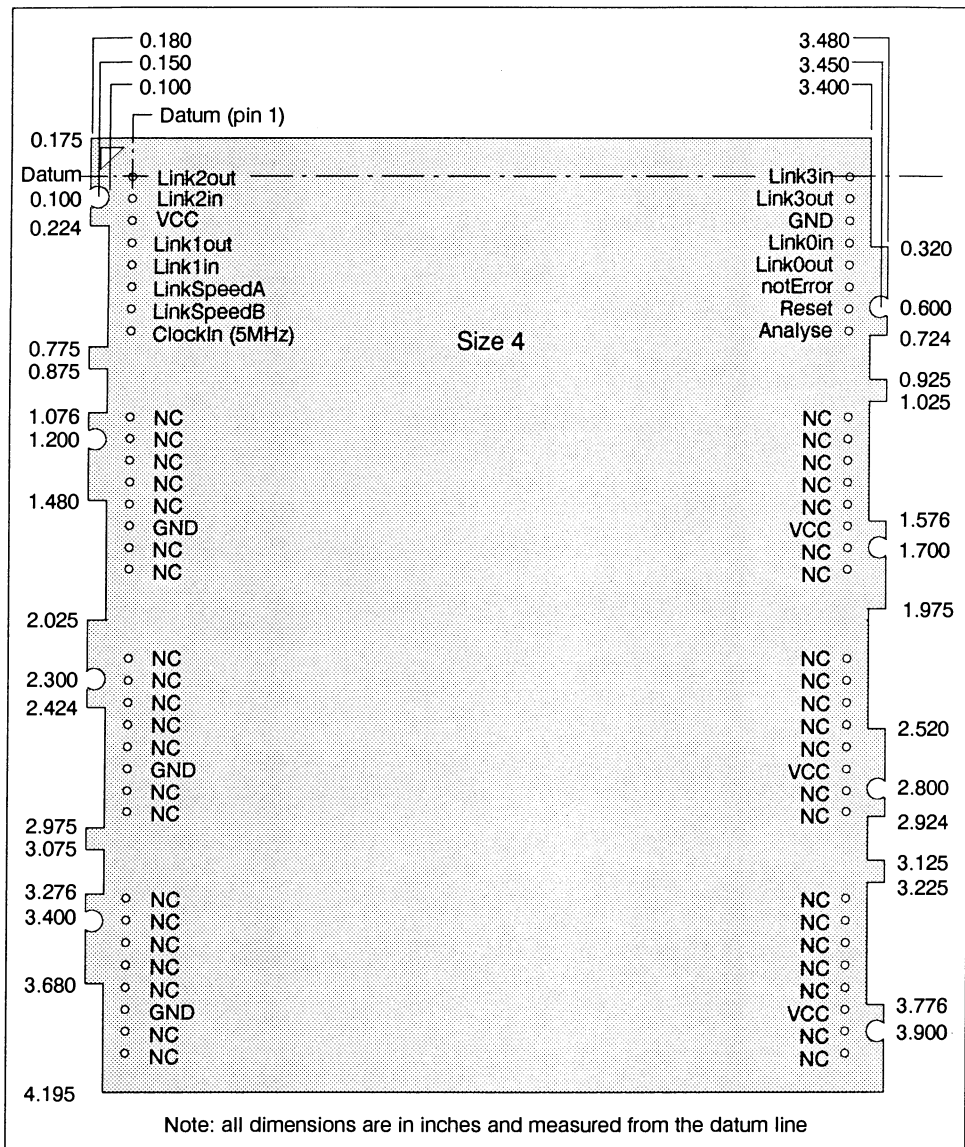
PCB profile drawings and pinout, TRAMs Size 4
